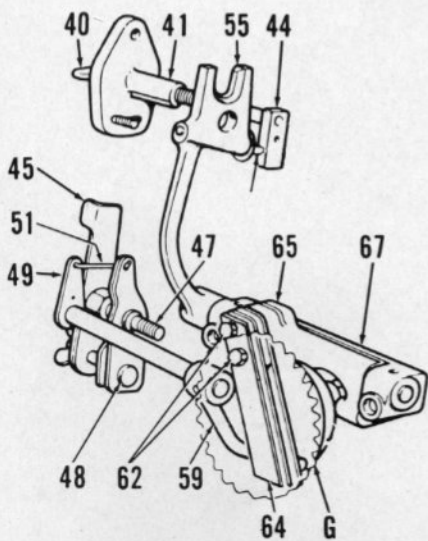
Diagram of governor mechanism. Refer to text and Fig. L5-11 for parts identification.
